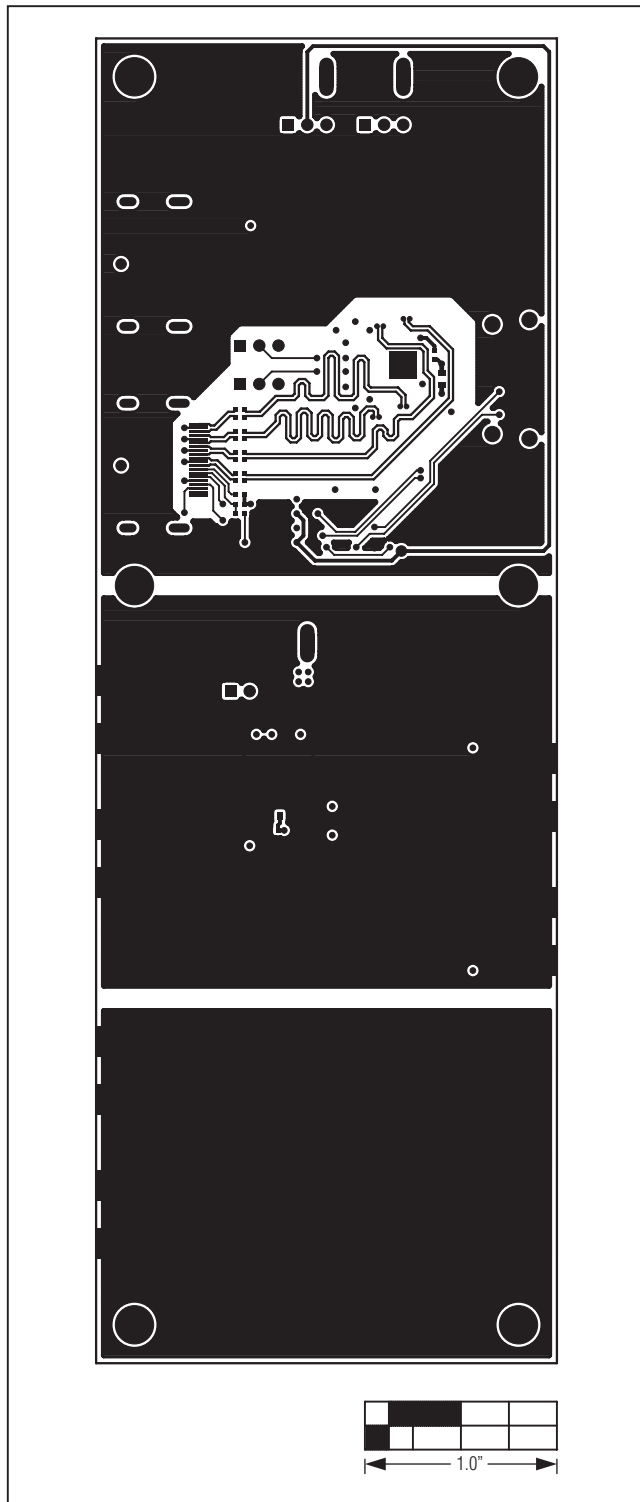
MAX14886 EV Kit PCB Layout—Solder Side
